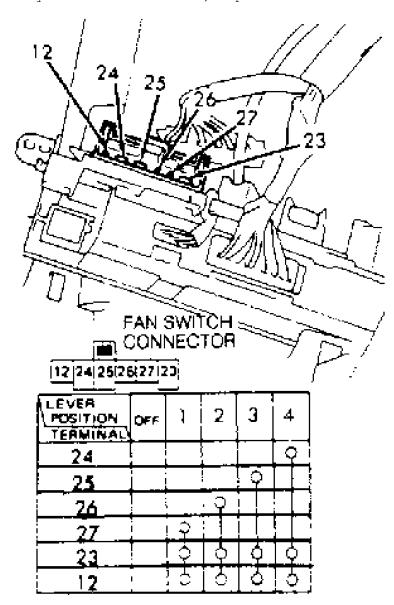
Testing Fan Switch (Typical) Courtesy of Nissan Motor Co., U.S.A.
